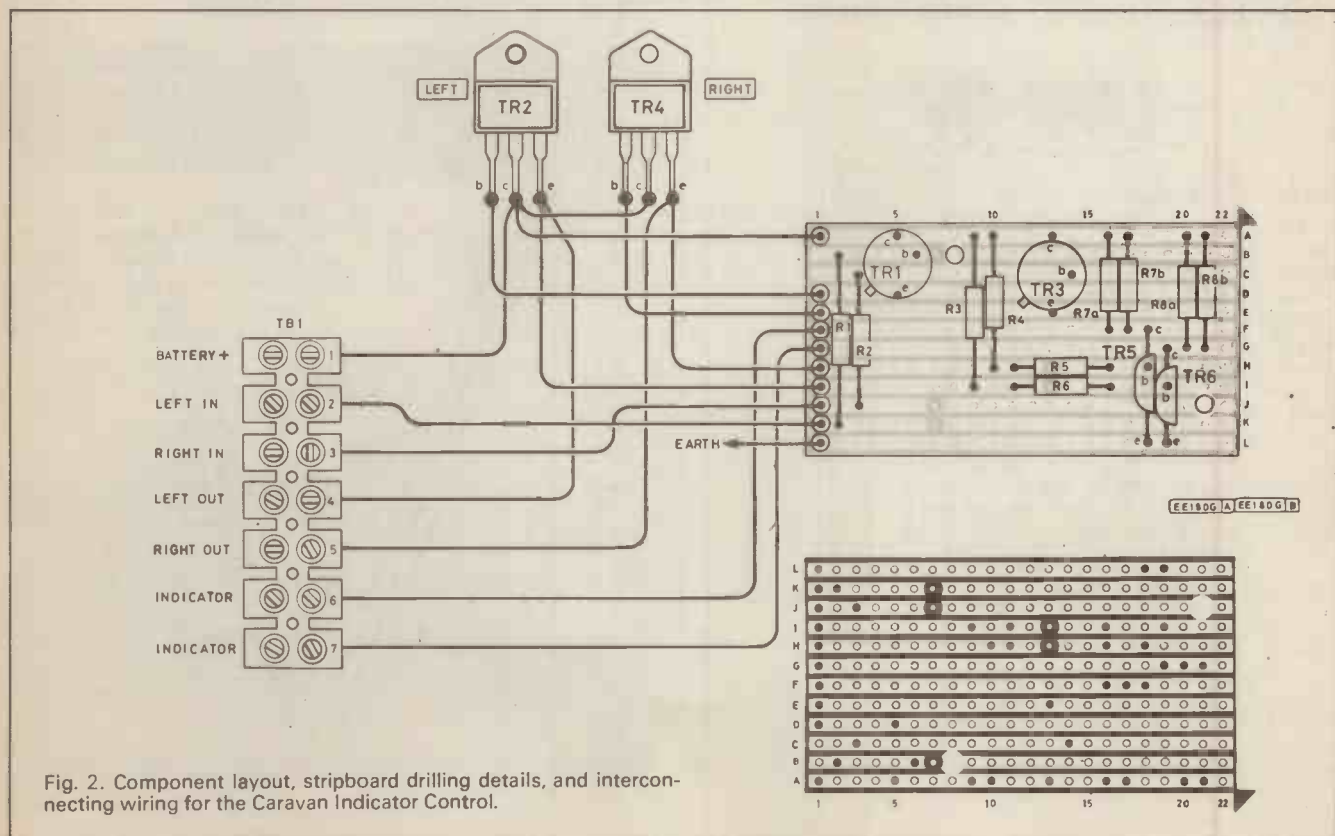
Component layout, stripboard drilling details, and interconnecting wiring for the Caravan Indicator Control.
